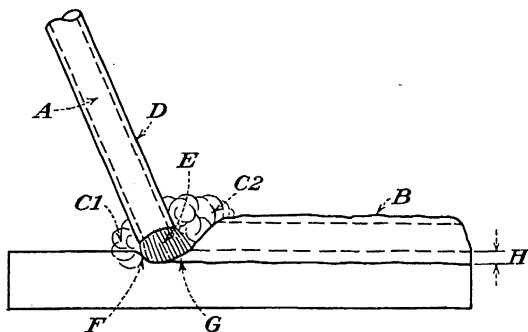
A.* Steel rod or core melts faster than coating *D.* *B.* Scale or slag coating on weld deposit. *C1, C2.* Gas shield protecting arc stream and molten metal from oxidation. *D.* Coating on electrode. *E.* Arc stream. *F.* Crater. *G.* Weld puddle. *H.* Penetration of weld into plate.
